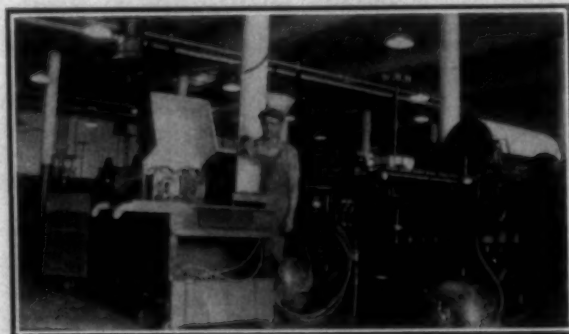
This illustration shows the graphic meter and the auxiliary transformers, mounted on a portable table. The operator has just connected the flexible cables so that the power to the motor driving the machine flows through the meter, which makes a record of the machine performance so long as it is connected in the circuit.
